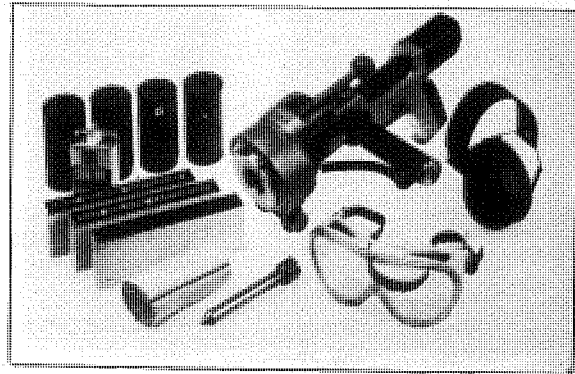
Hand held, portable explosive spot welding gun.
